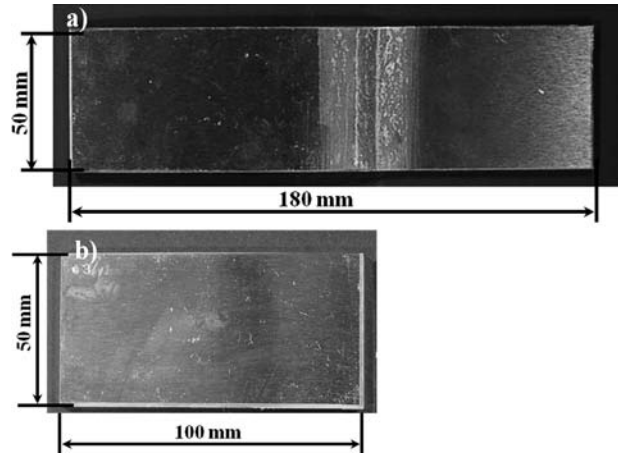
Corrosion samples; a) welding joint for tensile-shear test and metallography; b) base material
